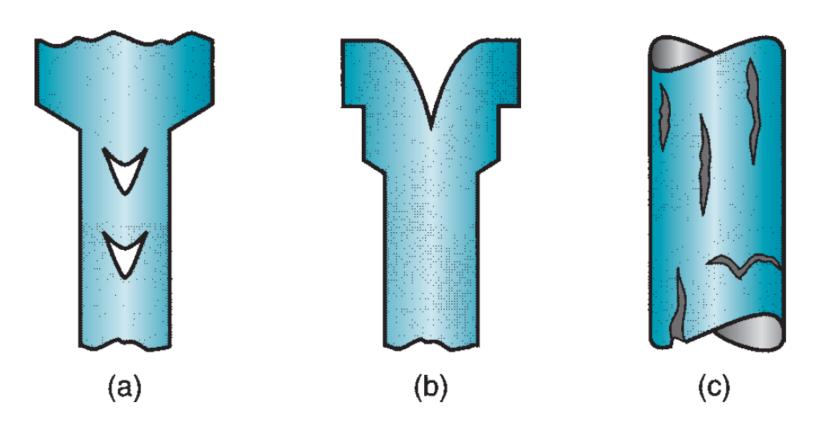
Some common defects in extrusion: (a) centerburst, (b) piping, and (c) surface cracking.
